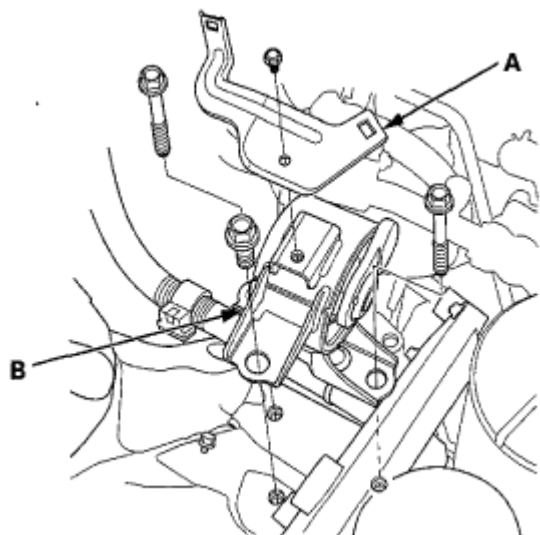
Identifying Wire Harness Bracket And Side Engine Mount
